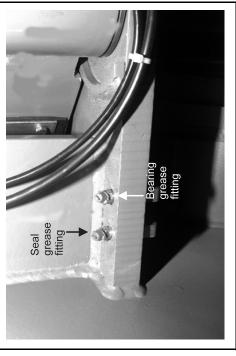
(MSSW0201CE) 80044 and 72044 Staph-Guard® Rear Bearing and Seal Grease Fittings (lo-
